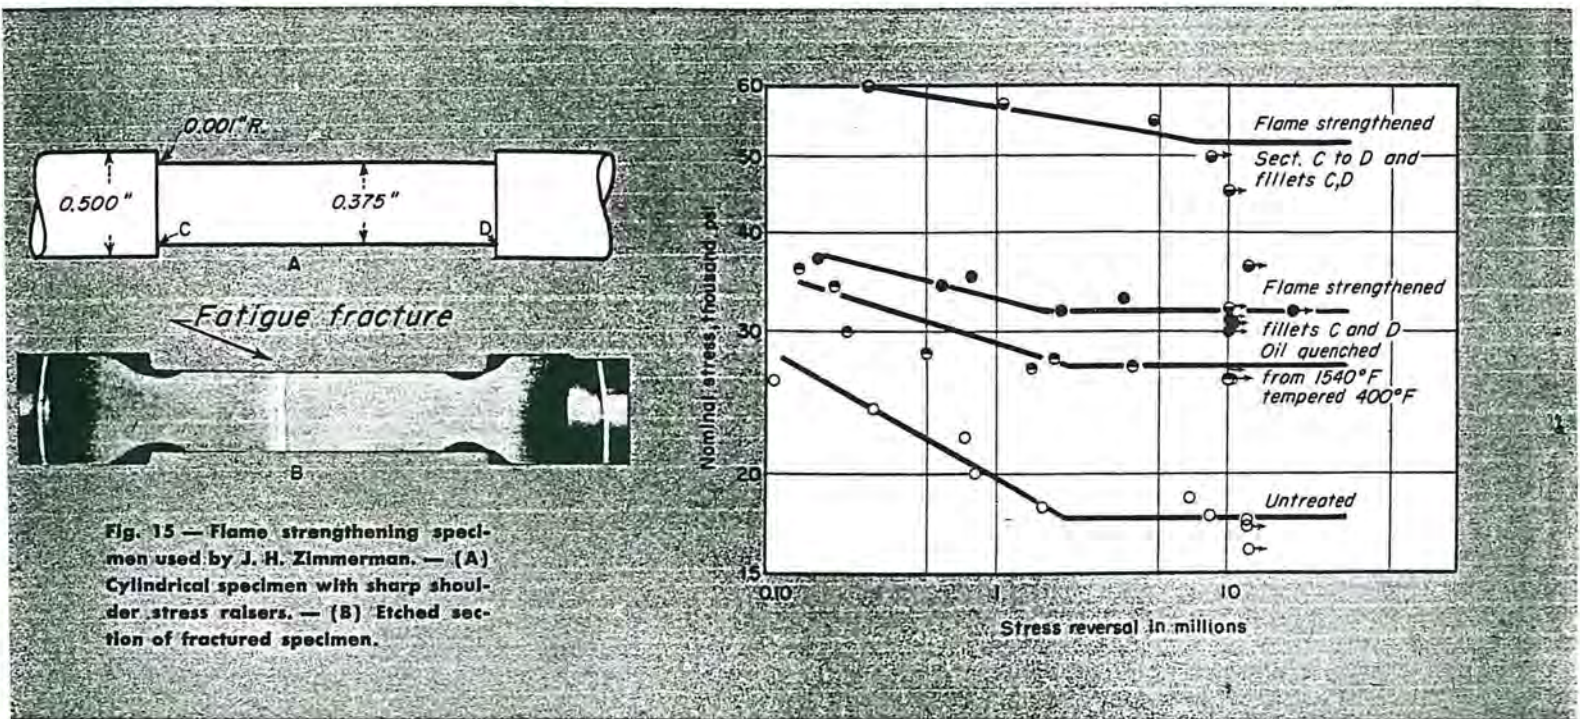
Flame strengthening specimen used by J. H. Zimmerman. — (A) Cylindrical specimen with sharp shoulder stress raisers. — (B) Etched section of fractured specimen.
